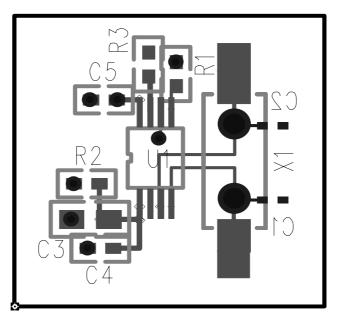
B. ICS840001 PC BOARD LAYOUT EXAMPLE
